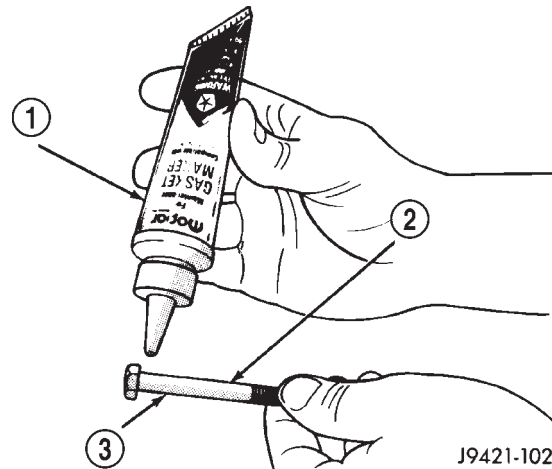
Applying Sealer To Retainer And Housing Bolts
